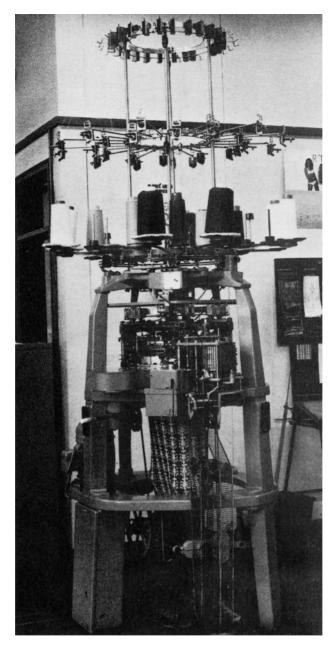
RTR circular garment length revolving cam-box rib machine. The peg drum control unit and timing chain are clearly visible. Also note the slipping belt take-down mechanism which draws down the stationary fabric [Walter Bullwer].
